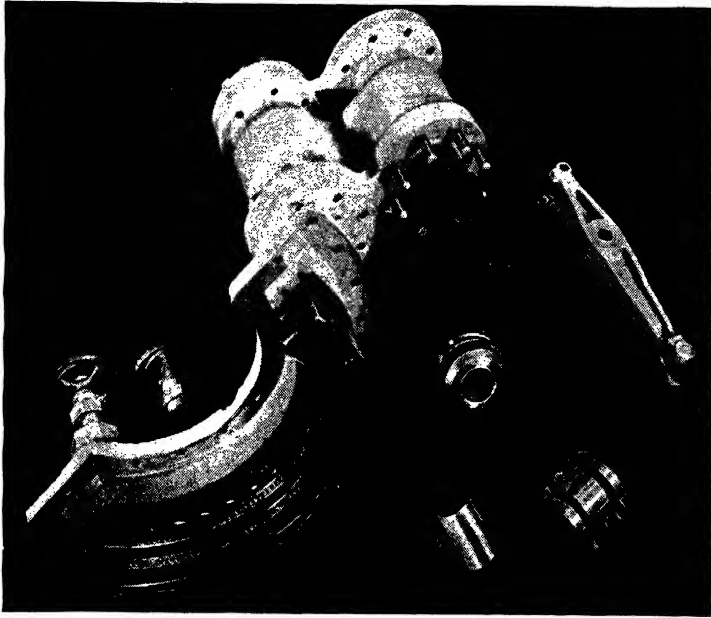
Reversing blades and nozzle block for the turbine shown in Figures 14-25 and 14-26. (Courtesy Elliott Co.)
